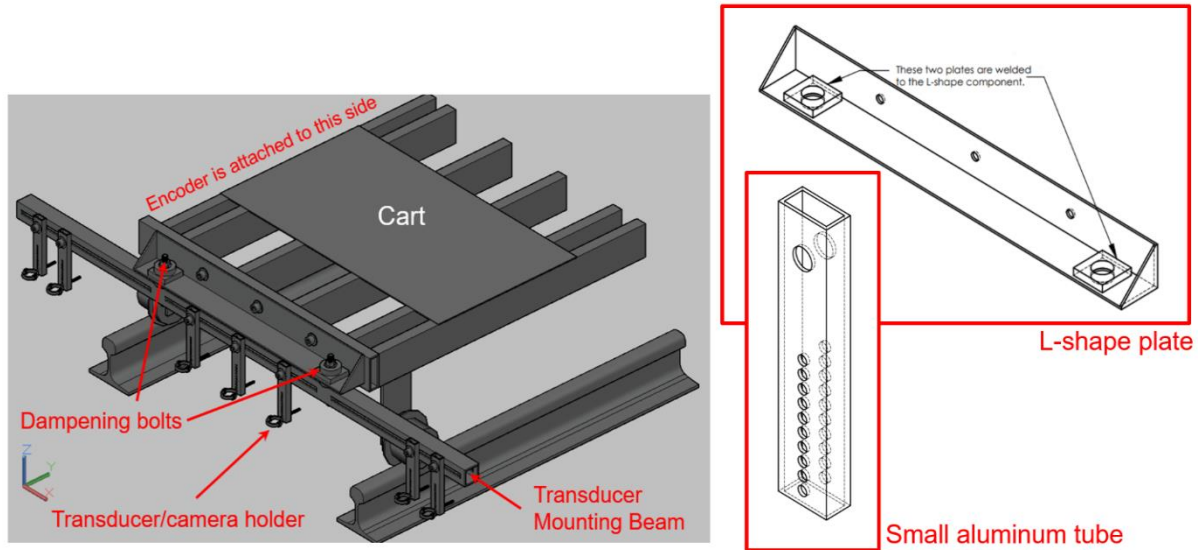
AutoCAD drawings of the designed prototype mounted on a test-cart
